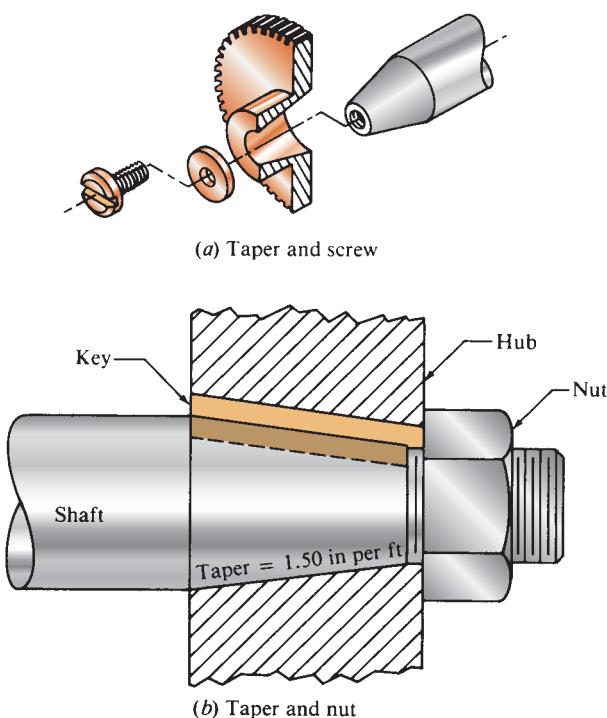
Tapered shaft for fastening machine elements to shafts
